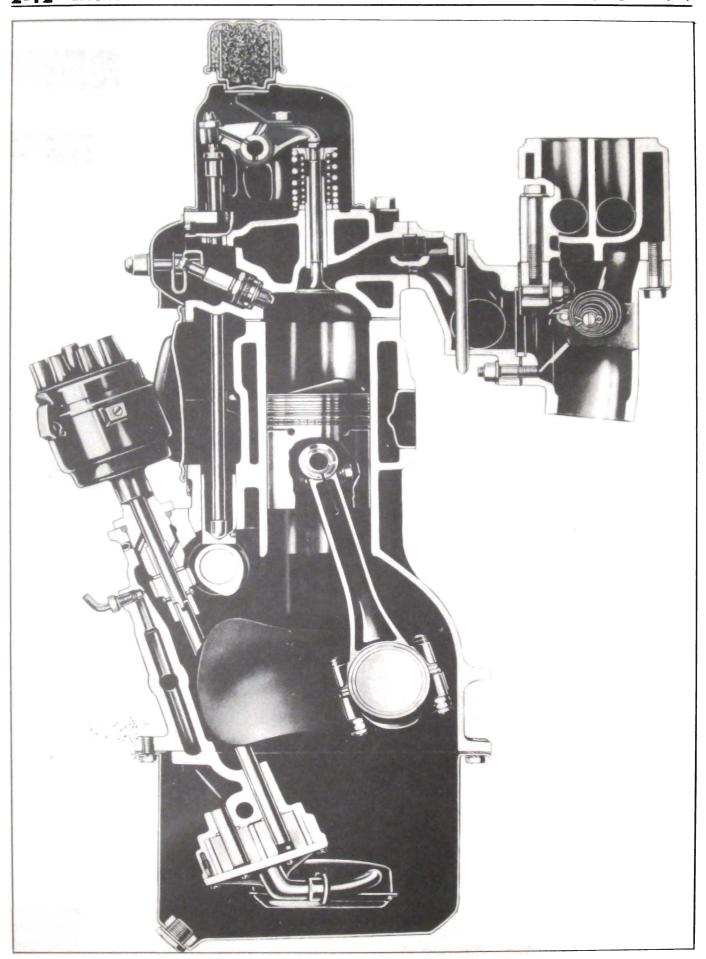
Engine, with Adjustable Valve Lash—End Sectional View
